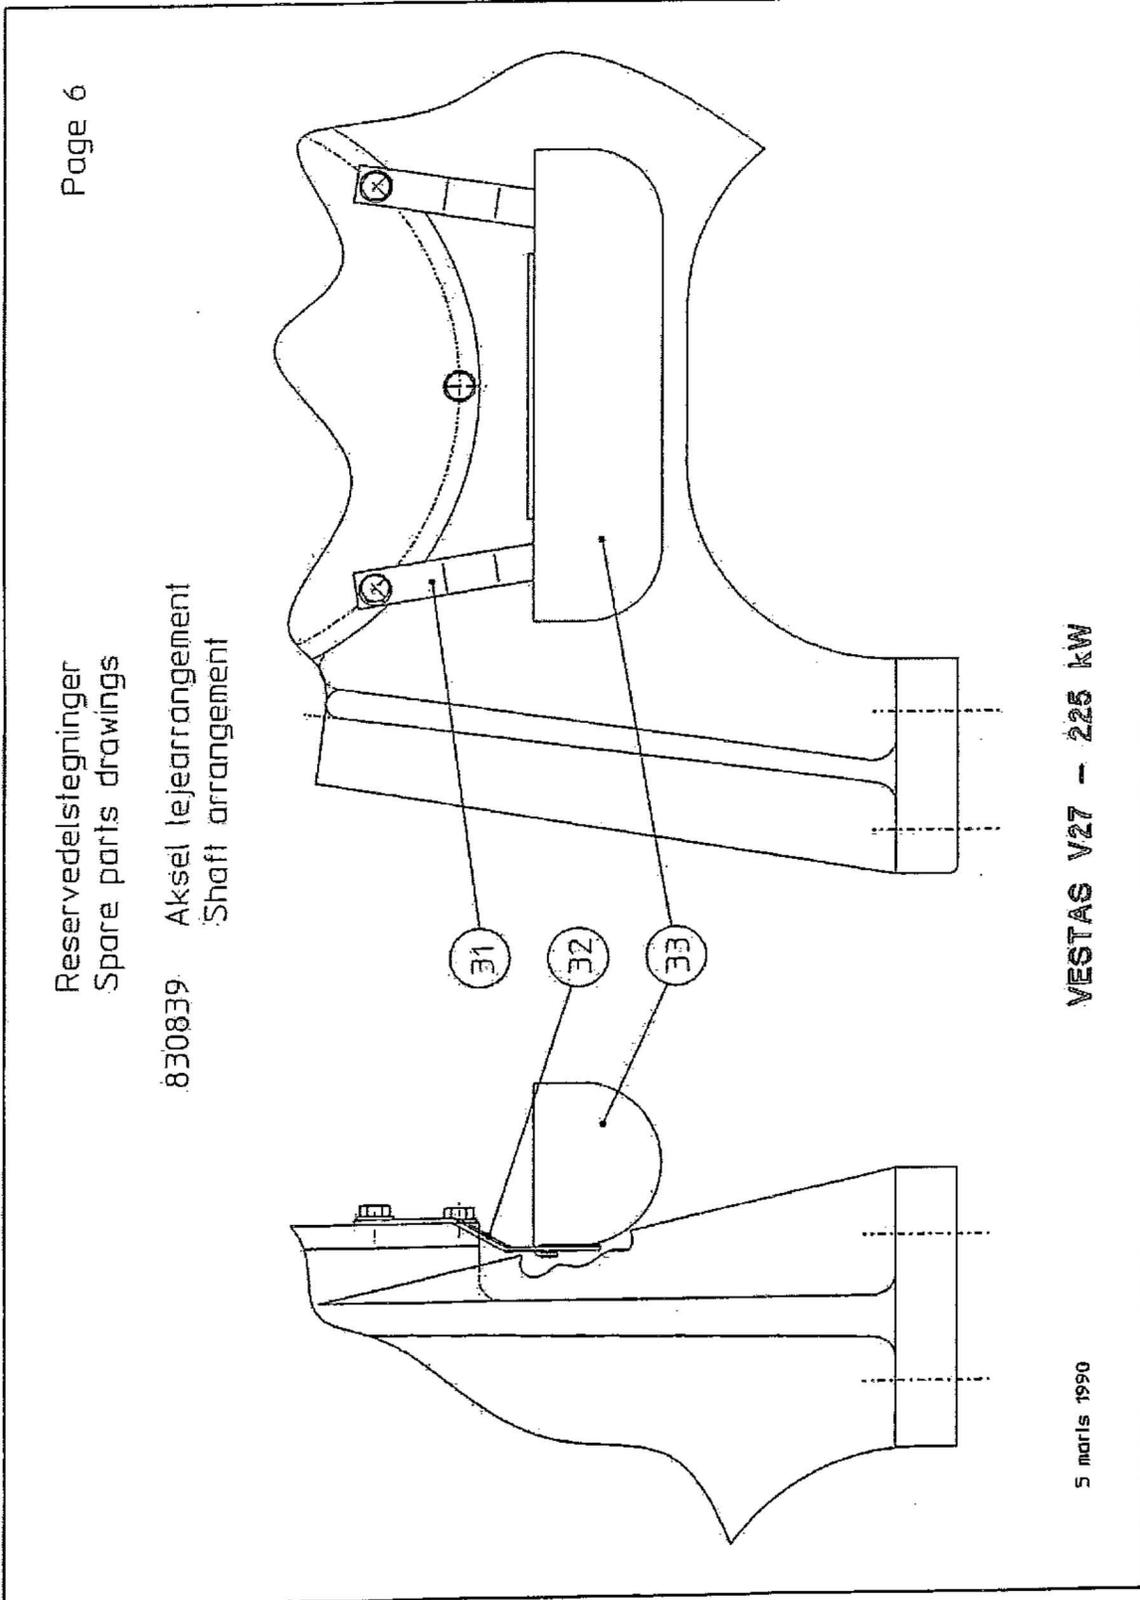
Spare parts drawing, main shaft assembly, V27, grease tray
